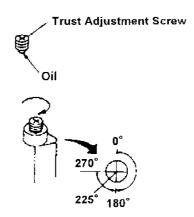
Adjustment of Thrust Adjustment Screw
